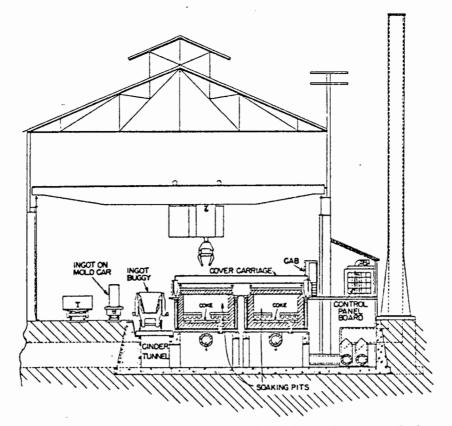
Schematic cross-section through a steel ingot soaking pit building.
